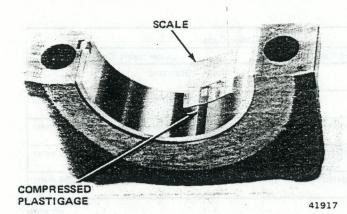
Measuring Main Bearing Clearance with Plastigage
